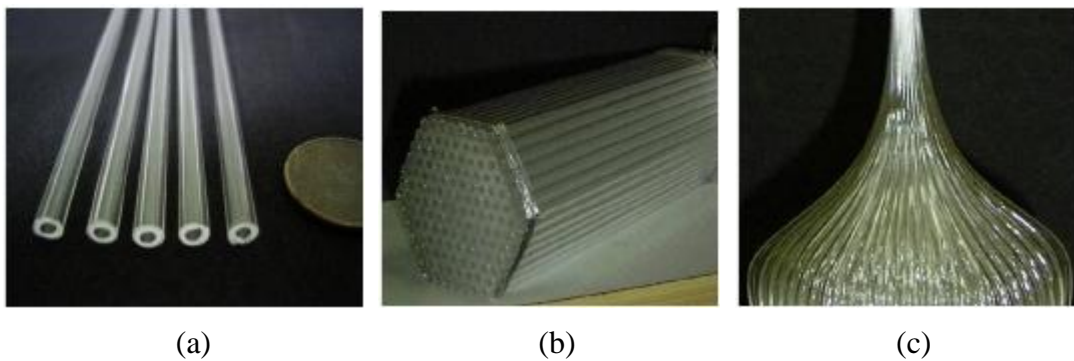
Fabrication processes of MPOFs. (a) step 1: cutting PMMA tubes; (b) step 2: packing and thermal annealing; (c) step 3: drawing into preform.
